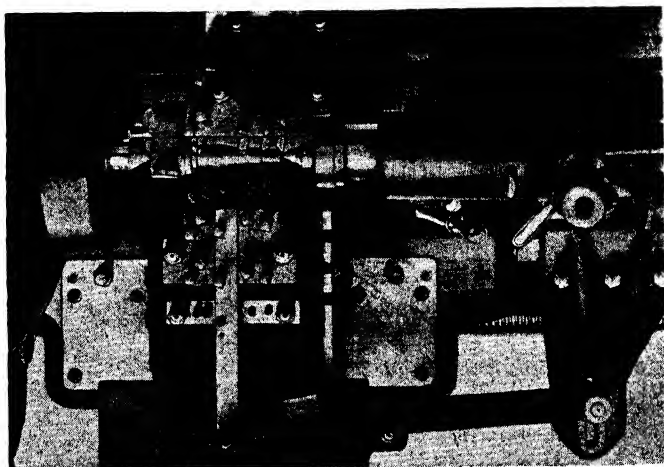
Tool set-up on Lodge & Shipley duomatic lathe.
